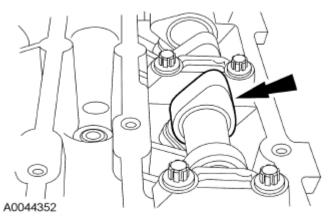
Locating Camshaft Lobe Position Courtesy of FORD MOTOR CO.
